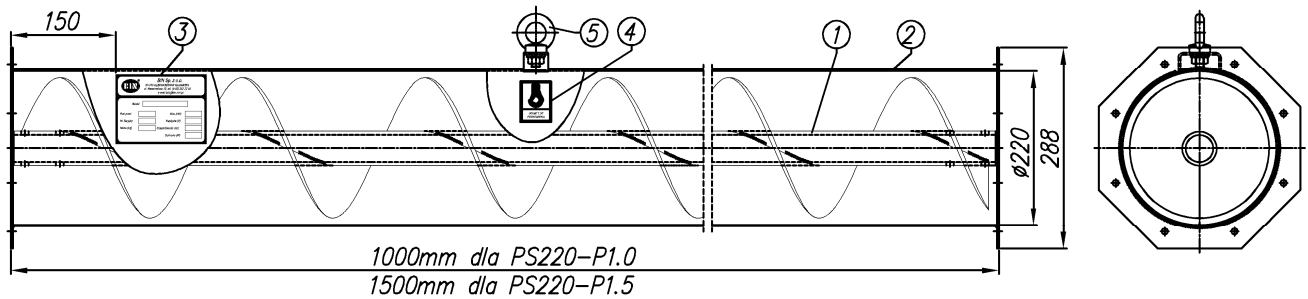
PS220-P1.0- screw conveyor  $\varnothing\varnothing 220$  – 1m screw conveyor extension
